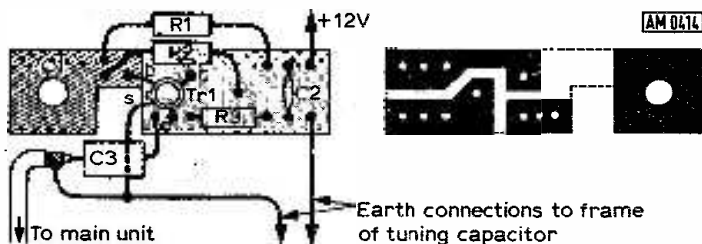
The buffer board as used with the Heathkit AJ-1214 tuner. This is a small piece of printed circuit board which is screwed on top of the VHF oscillator as shown in the photograph. The shaded area indicates copper both sides of the board.
